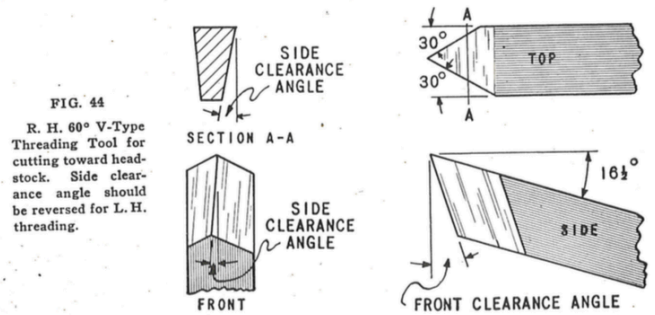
R. H. 60° V-Type Threading Tool for cutting toward headstock. Side clearance angle should be reversed for L. H. threading.
